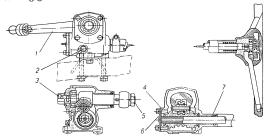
Steering Gear 1 — Steering arm, 2 — filler plug, 3 — mesh clearance adjusting screw, 4 — worm bearing adjusting shims, 5 — steering arm shaft, 6 — front cover, 7 — steering shaft.
